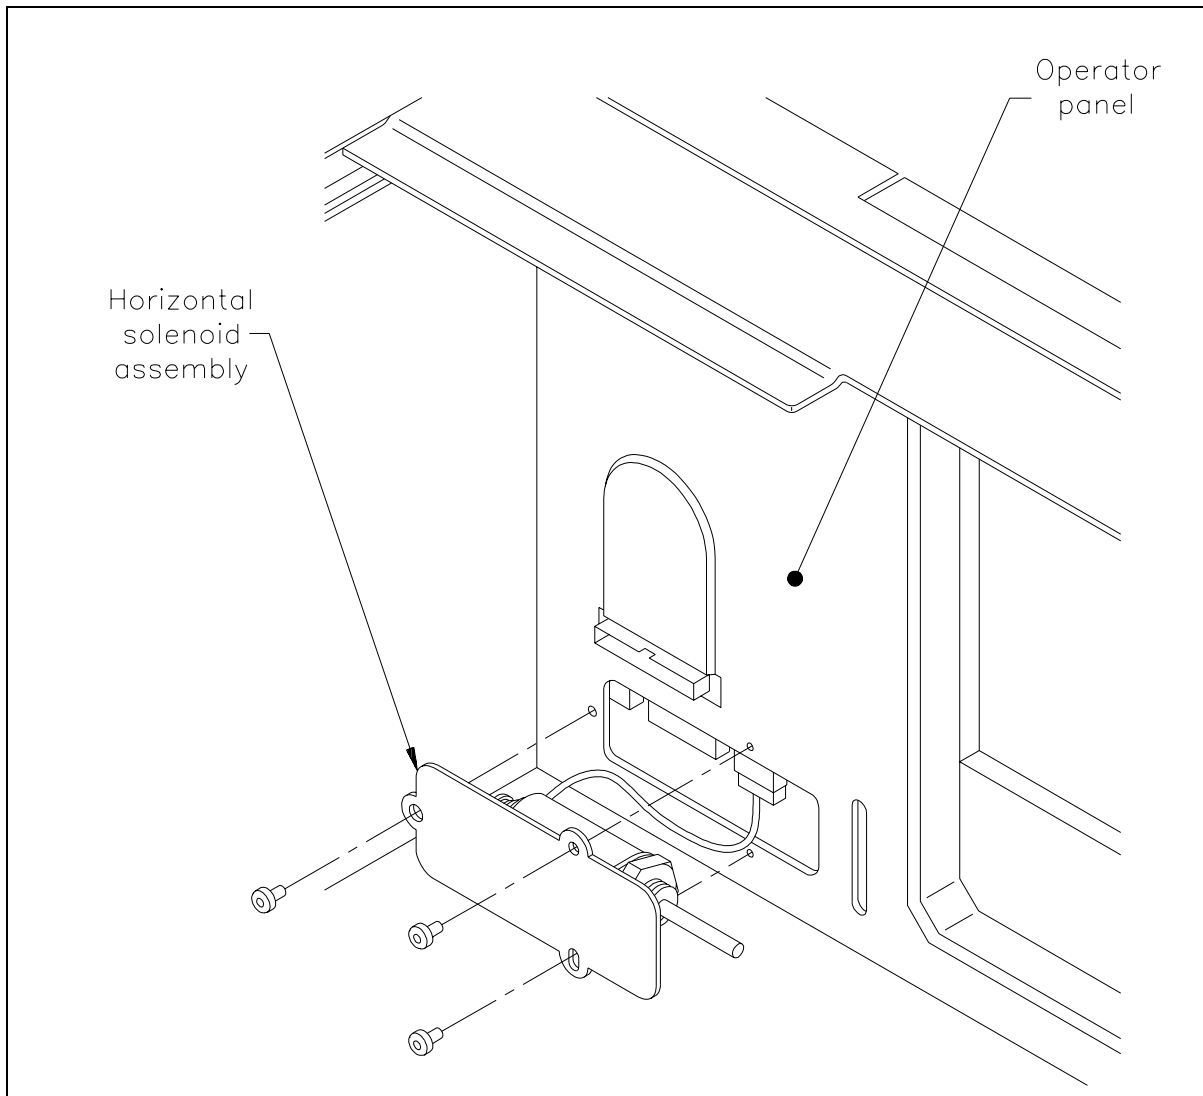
Detaching the solenoid bracket from the rack-mount model
